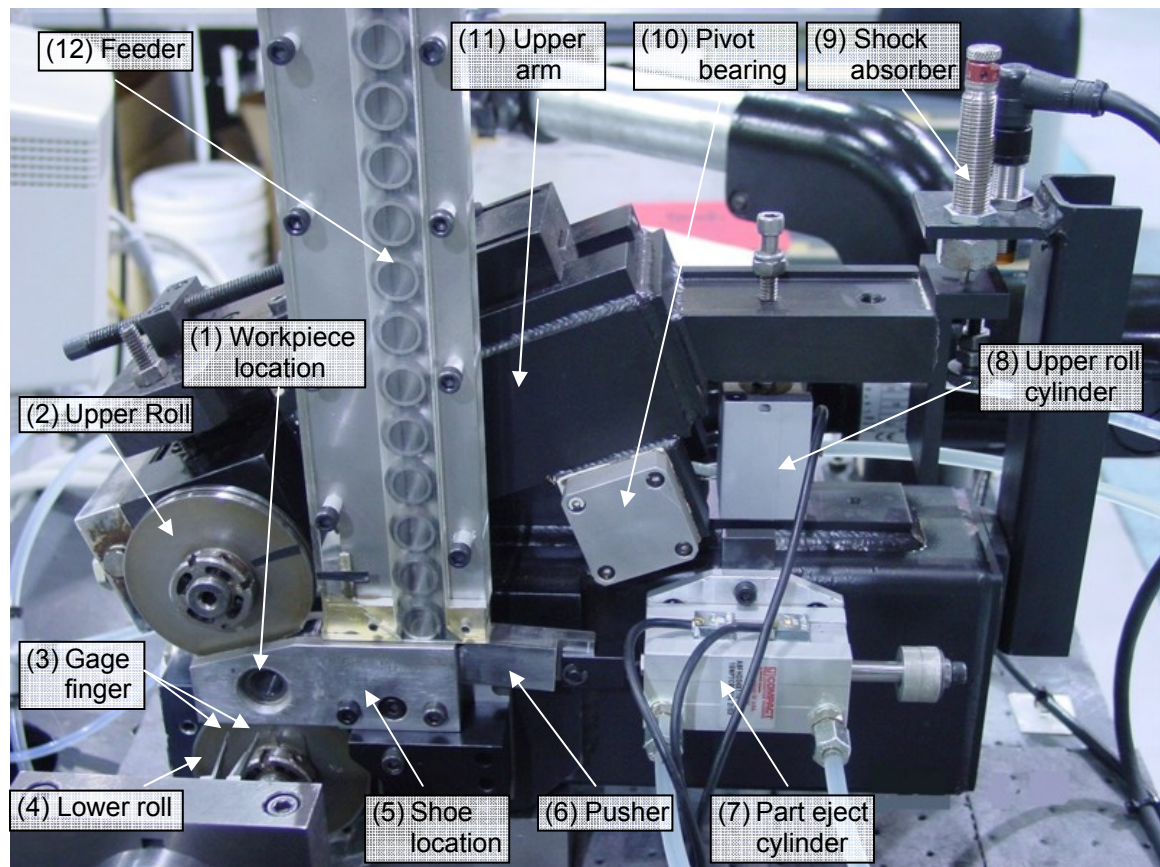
Setup of the roll-shoe centerless fixture with gage fingers
